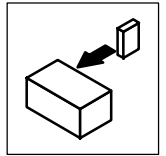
Dimensions 8201 - 8204: DIN rail assembly
